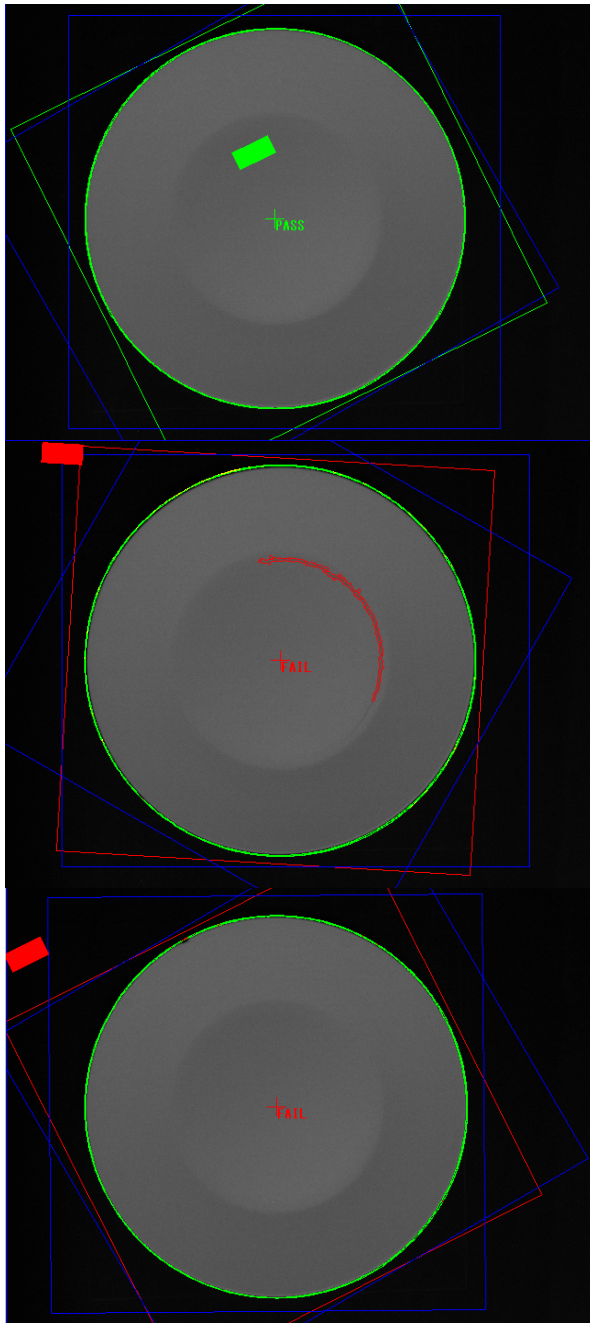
Evaluation of plates surface and flaws defects. First image: Pass inspection. Second image: Fail inspection for surface defects. Third image: Fail inspection for cracks defects.
